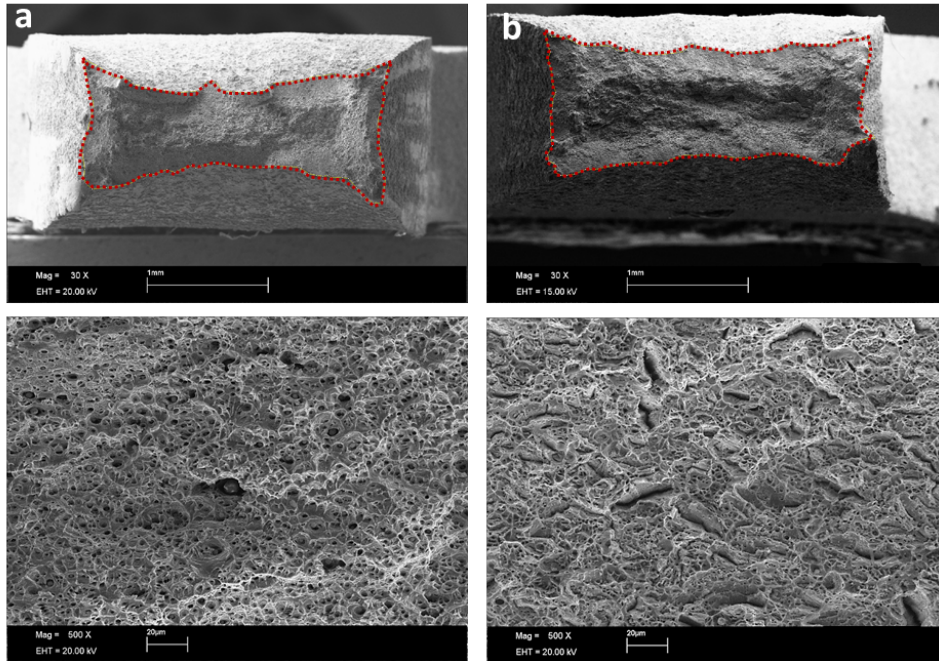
Fracture surfaces of tensile specimens a- in the as-welded and b- heat-treated states.
